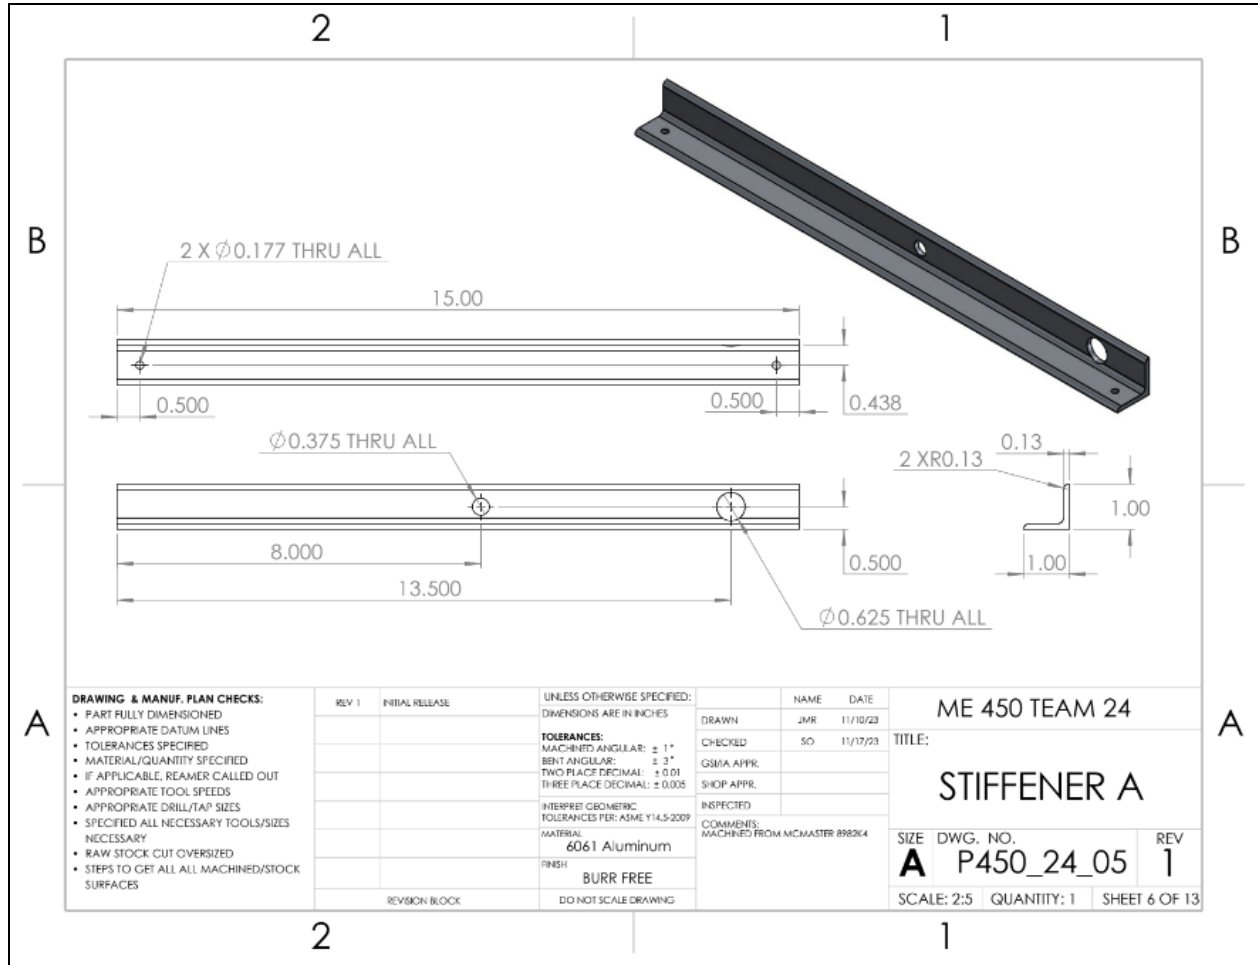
Manufacturing drawing for the first of the stiffener components of the beta design.
